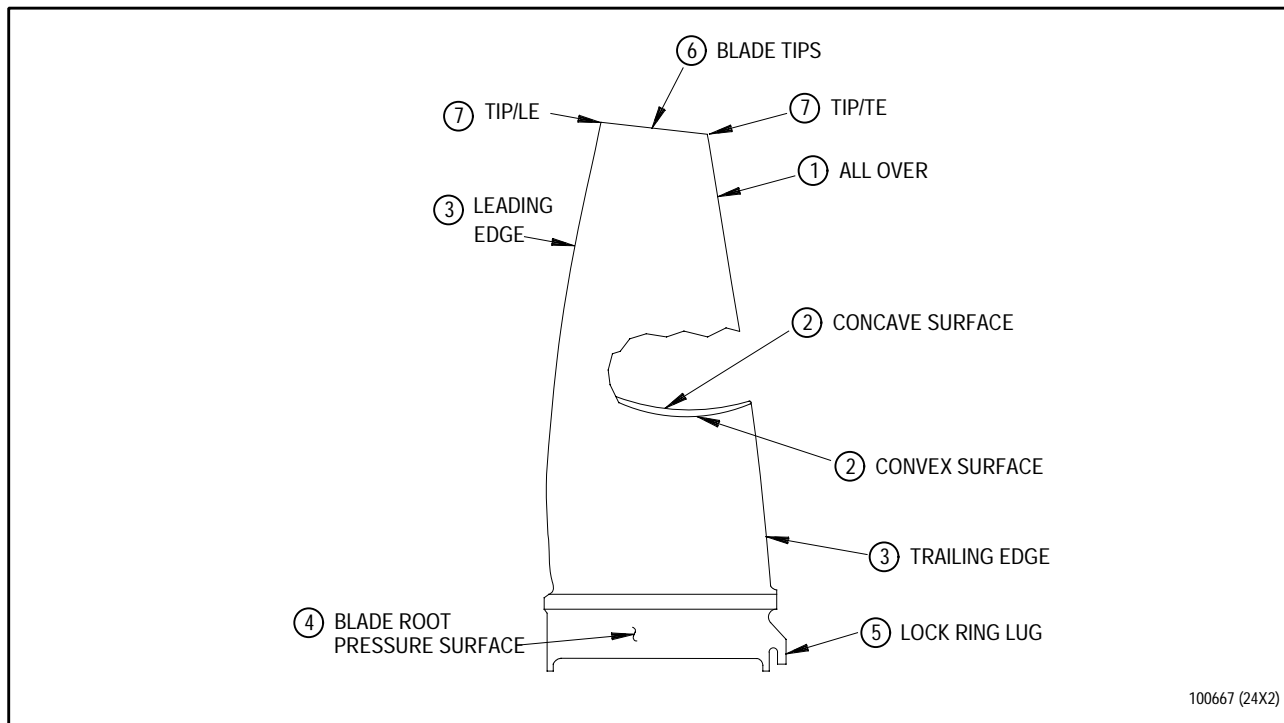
Compressor Rotor Blades - Fourth and Fifth Stage Inspection (Sheet 1 of 2)
